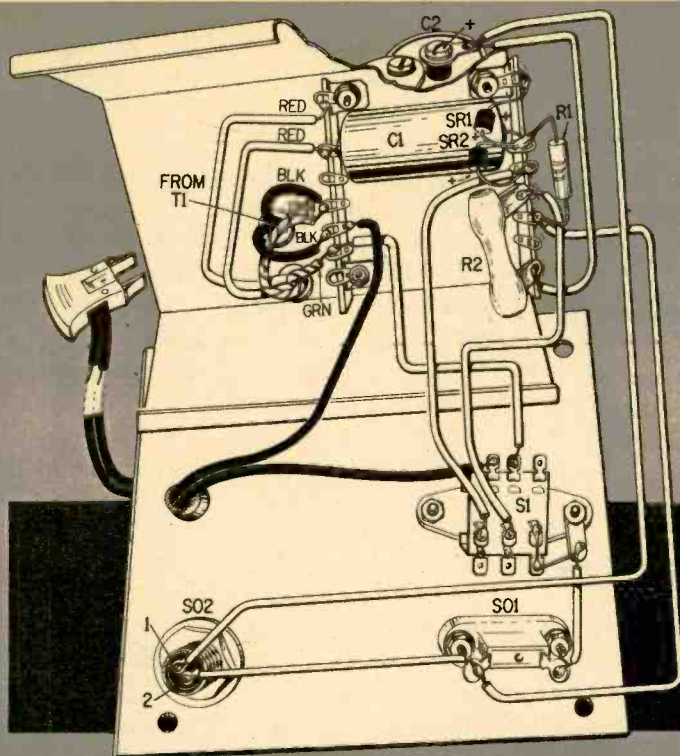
View of underside of chassis shows wiring to sockets and switch on cabinet cover plate. Negative lug on C2 is connected to chassis with a strap made of scrap aluminum. Before closing cabinet check to make sure lugs on S1 and S01 don't touch edge of chassis.
